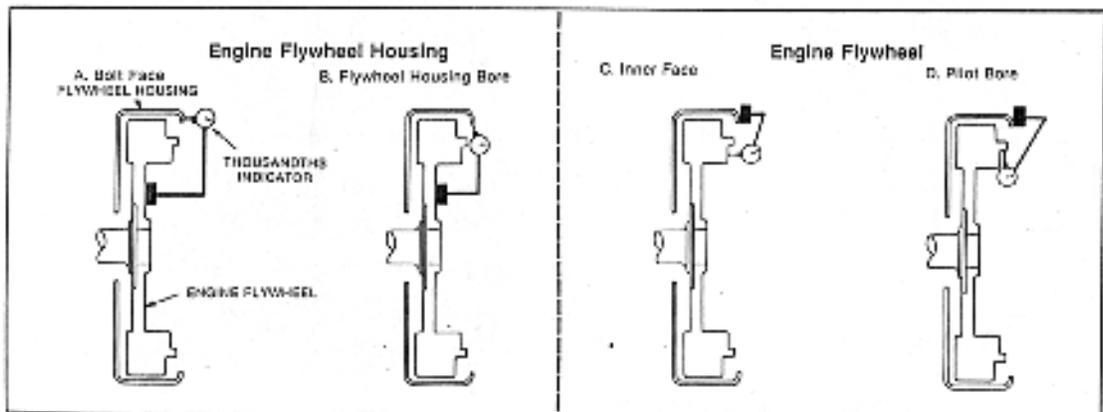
Dial Indicating Flywheel Housing and Engine Flywheel.
